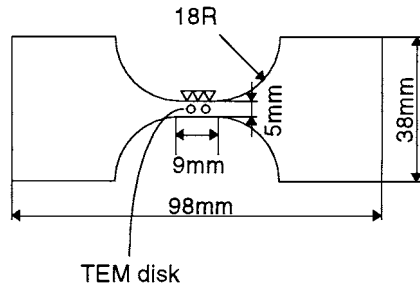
Dimension of the specimen for strain controlled fatigue test (axial tension-compression test).
